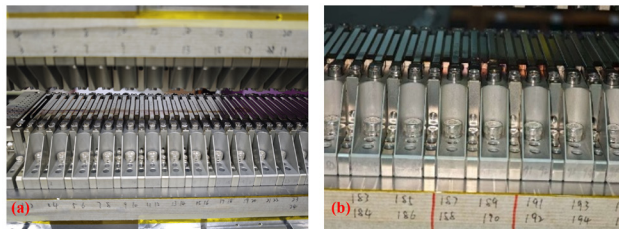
Damage to magnet blocks and poles: (a) surface charring; (b) pitting.
